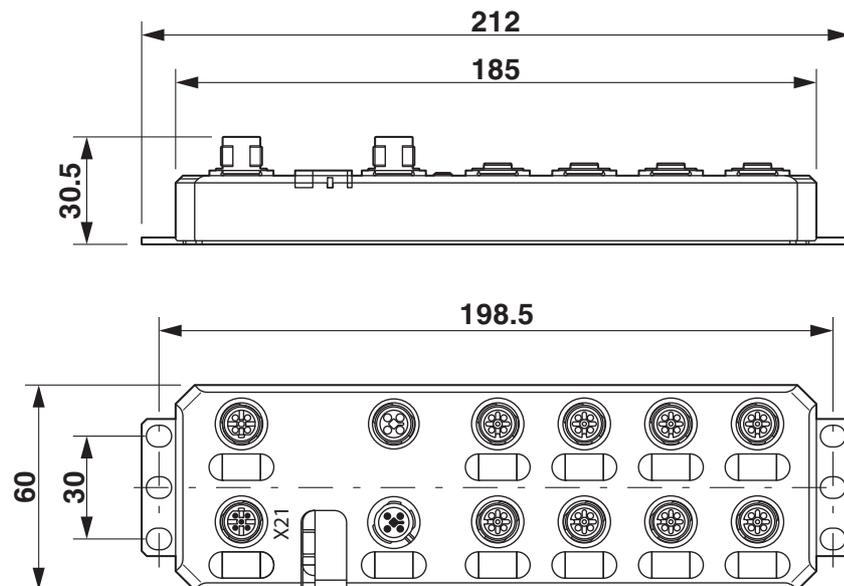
Housing dimensions (mm) of PROFIBUS metal devices with extended fixing clips
